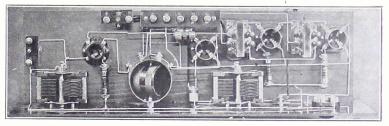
, showing the internal wiring as well as the layout of the parts of the 4-tube Diamond.
